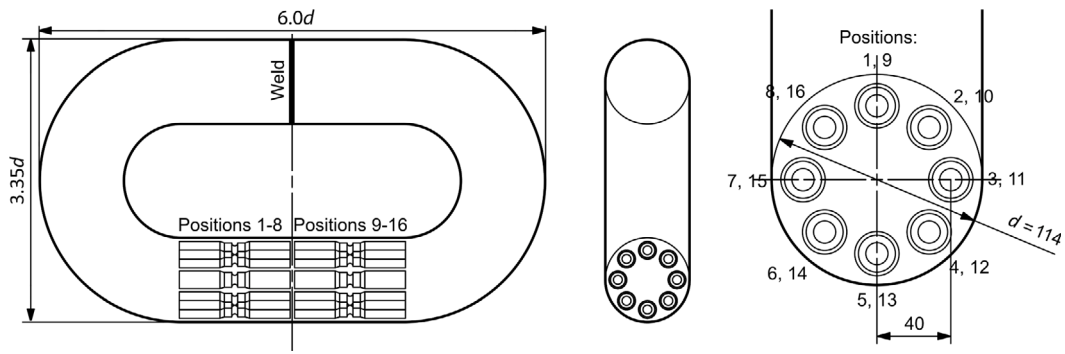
Cutting specification for TP1 specimens from a chain link. All dimensions are given in millimeters.
